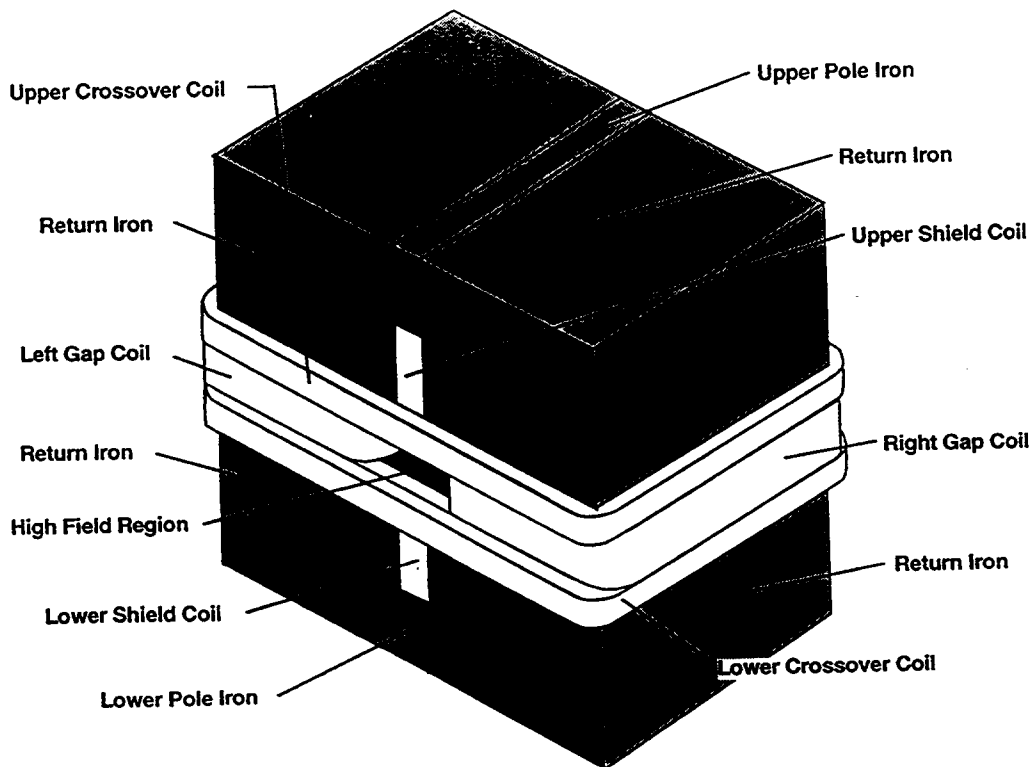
A Three Dimensional View of the Fully Assembled Light Source Dipole
